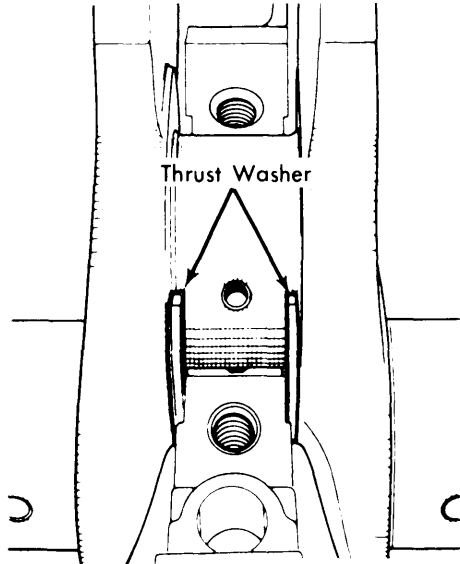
Crankshaft Thrust Washers in Fitted Position
